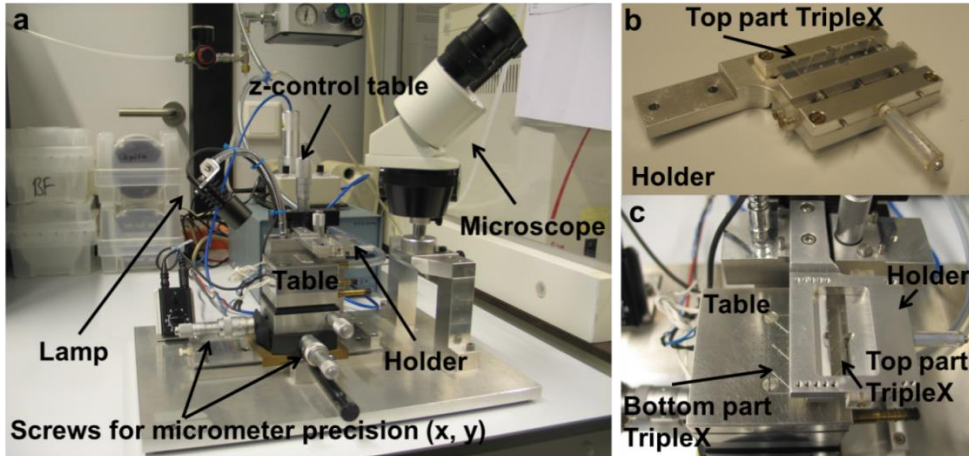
Chip aligner. a) In-house built alignment machine for the chip-level assembly, used for the bonding of the multiplexed devices. b) One glass part of the microfluidic device is placed in a holder, which is screwed on top of a table and can be moved in the x -, y -, and z -direction with micrometer precision (c). The other glass part is held on the table with vacuum (c). The alignment and bonding processes are continuously monitored with the help of a microscope.
